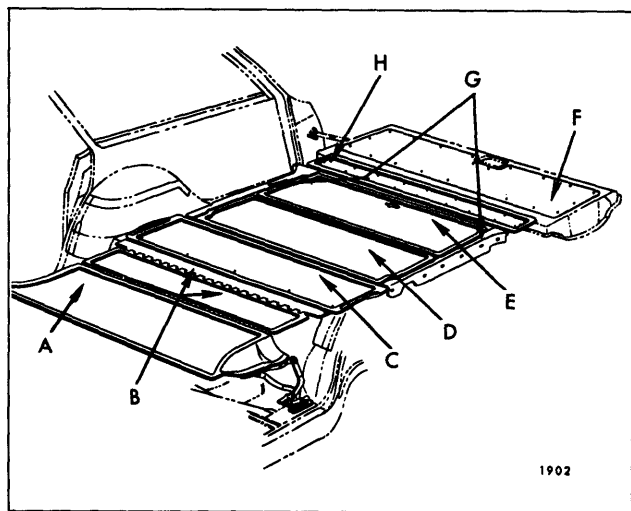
Folding Seat and Floor Panels - Pontiac "B-35" Styles
